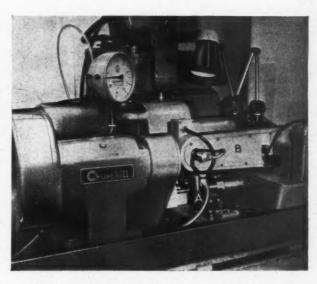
In this close-up view of the Churchill type BW cylindrical grinder, the gauging head of the sizing equipment is shown at A, and the hydraulically-operated loading arm at B
